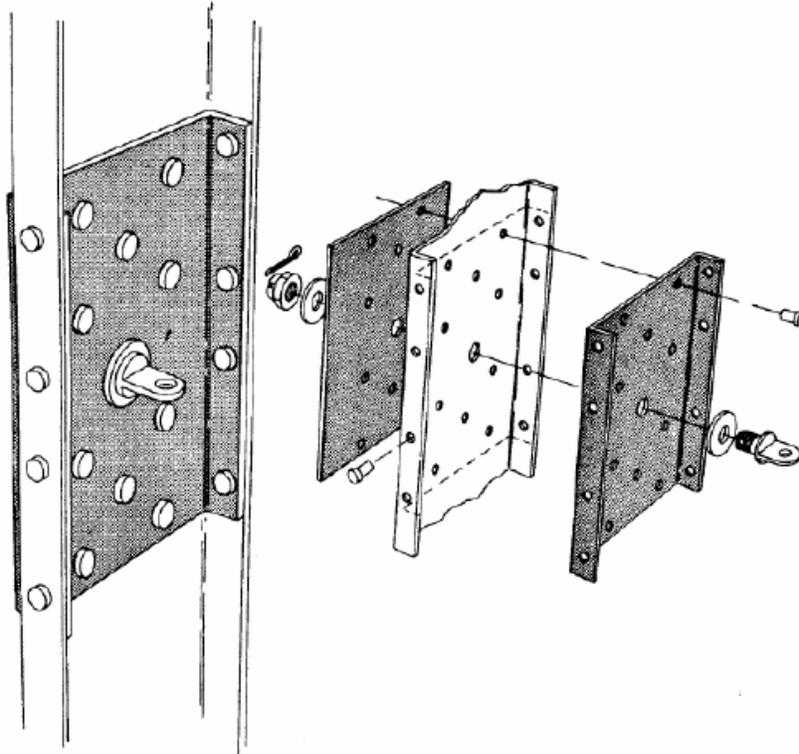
TYPICAL STRINGER SECTION REINFORCEMENT INSTALLATION
